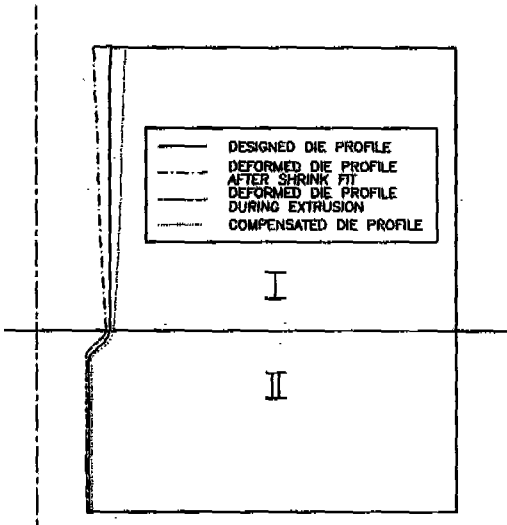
The control method for die dimensions to improve the dimensional accuracy of cold forged parts
